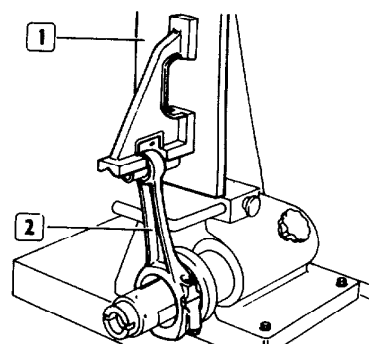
DETAILS OF CONNECTING ROD, BUSH, PISTON PIN, PISTON AND BEARINGS
